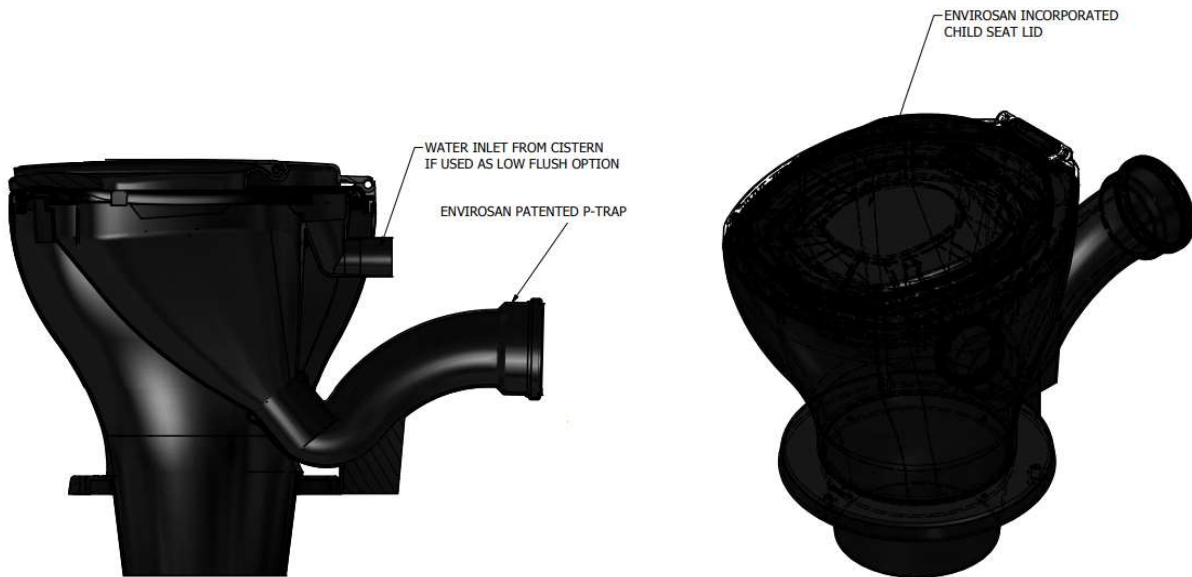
“Envirosan” pour flush toilet design, side view(left)& isometric view(right)
